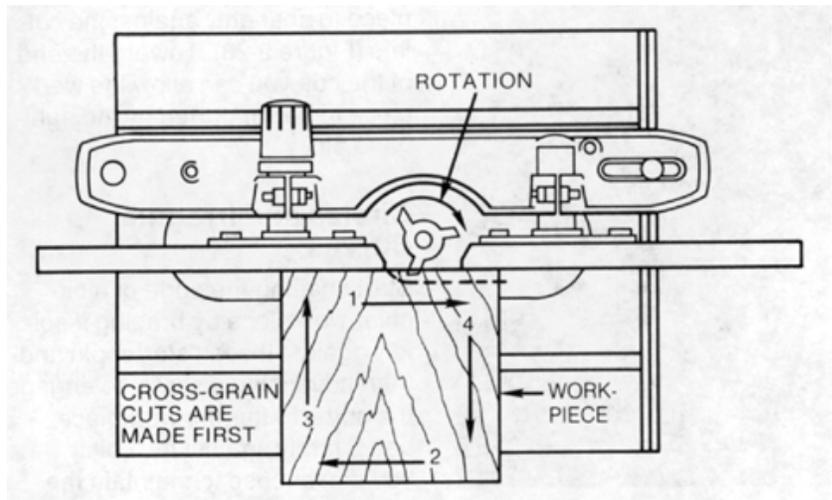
Make the cross-grain cuts first when shaping all four edges of a workpiece.
